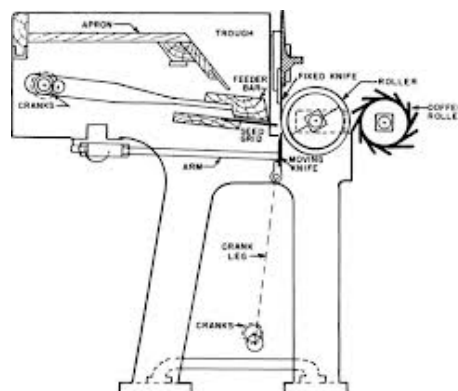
Single Roller Gin manufactured by Platt Brothers Oldham UK
